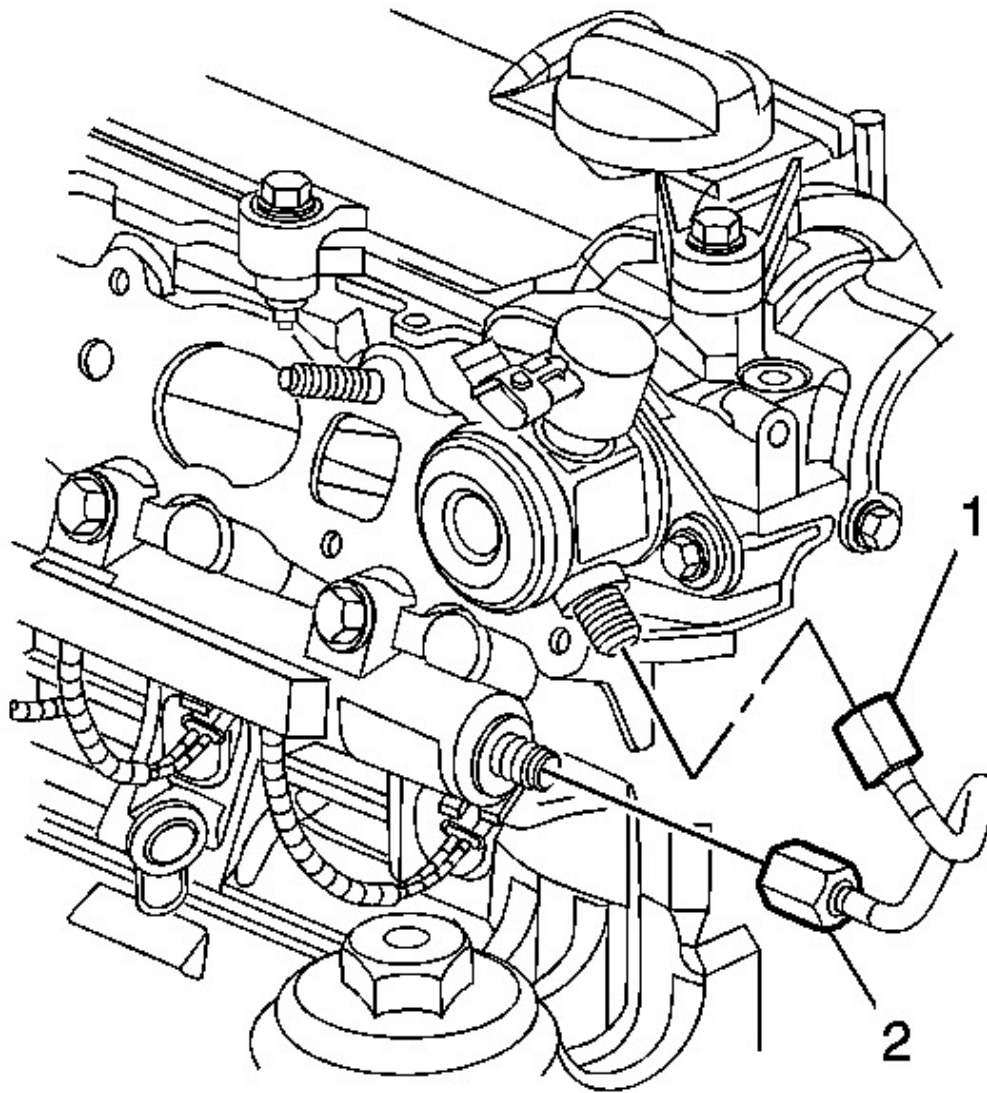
View Of Fuel Feed Intermediate Pipe Fittings
